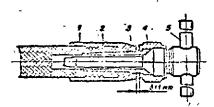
MOUNTING OF FITTINGS ON MICH-PRESSURE BOSES
